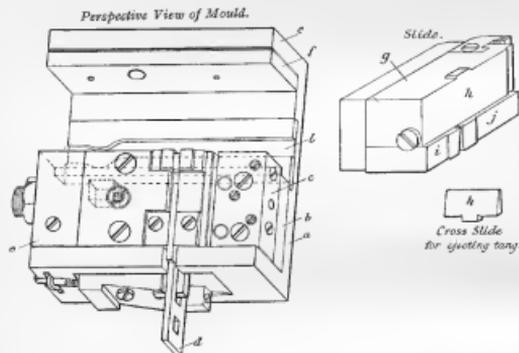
Monotype mould; single-blade. Scale: about half size.
